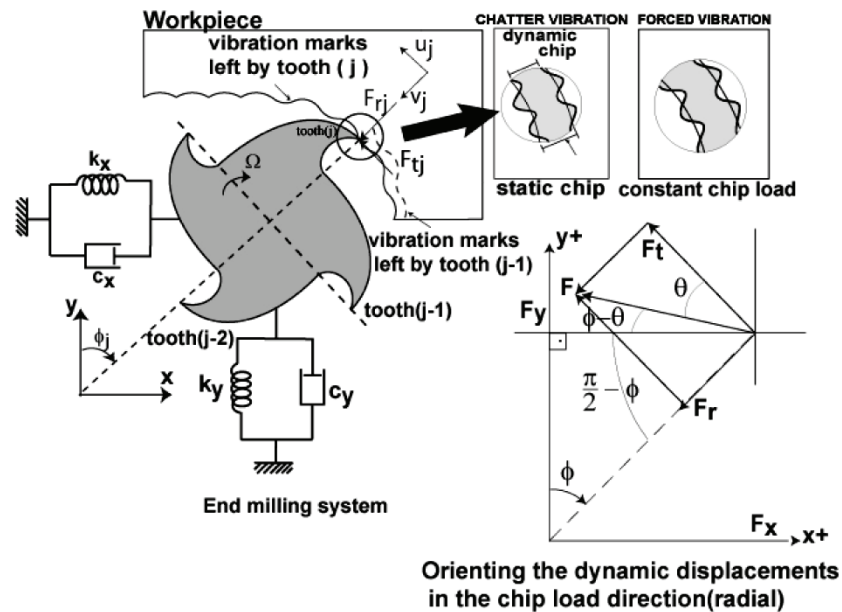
Flexible machine tool system (Altintas and Weck, 2004)
